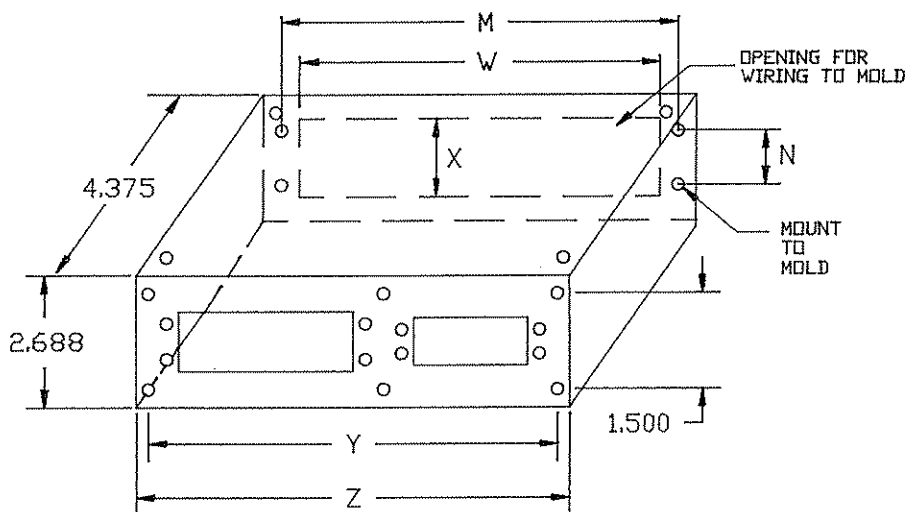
MOLD CONNECTOR MOUNTING BOX (optional)
